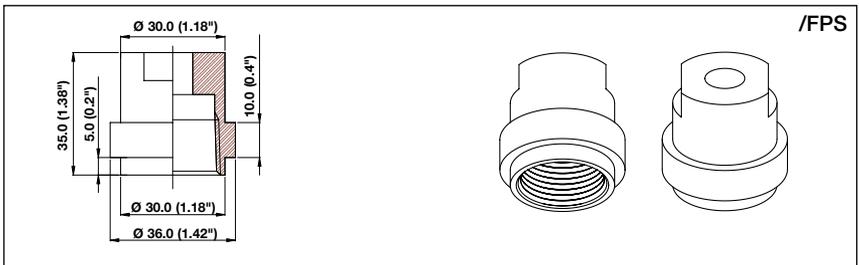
Dimensions FU20 adapter for FF40, FS40 and FD40 fittings
